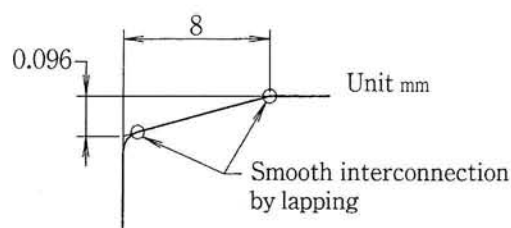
Crowning dimensions for large-diameter BUR bearings
